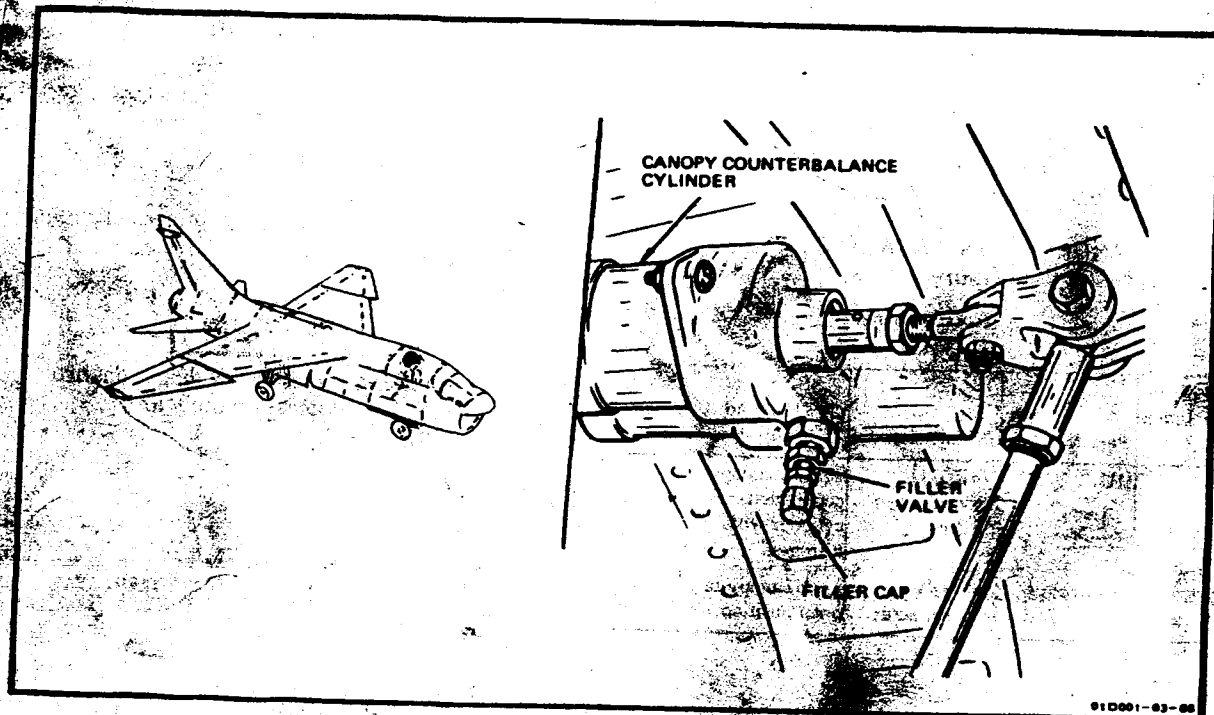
Canopy Counterbalance Cylinder Servicing
